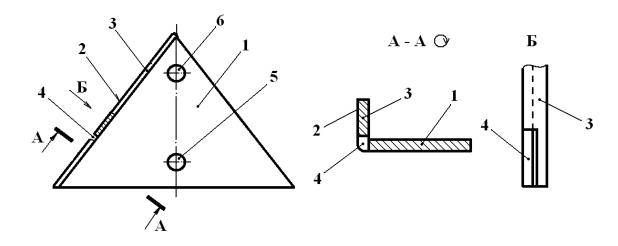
A knitting machine wedge with a bend and an elastic working surface.
